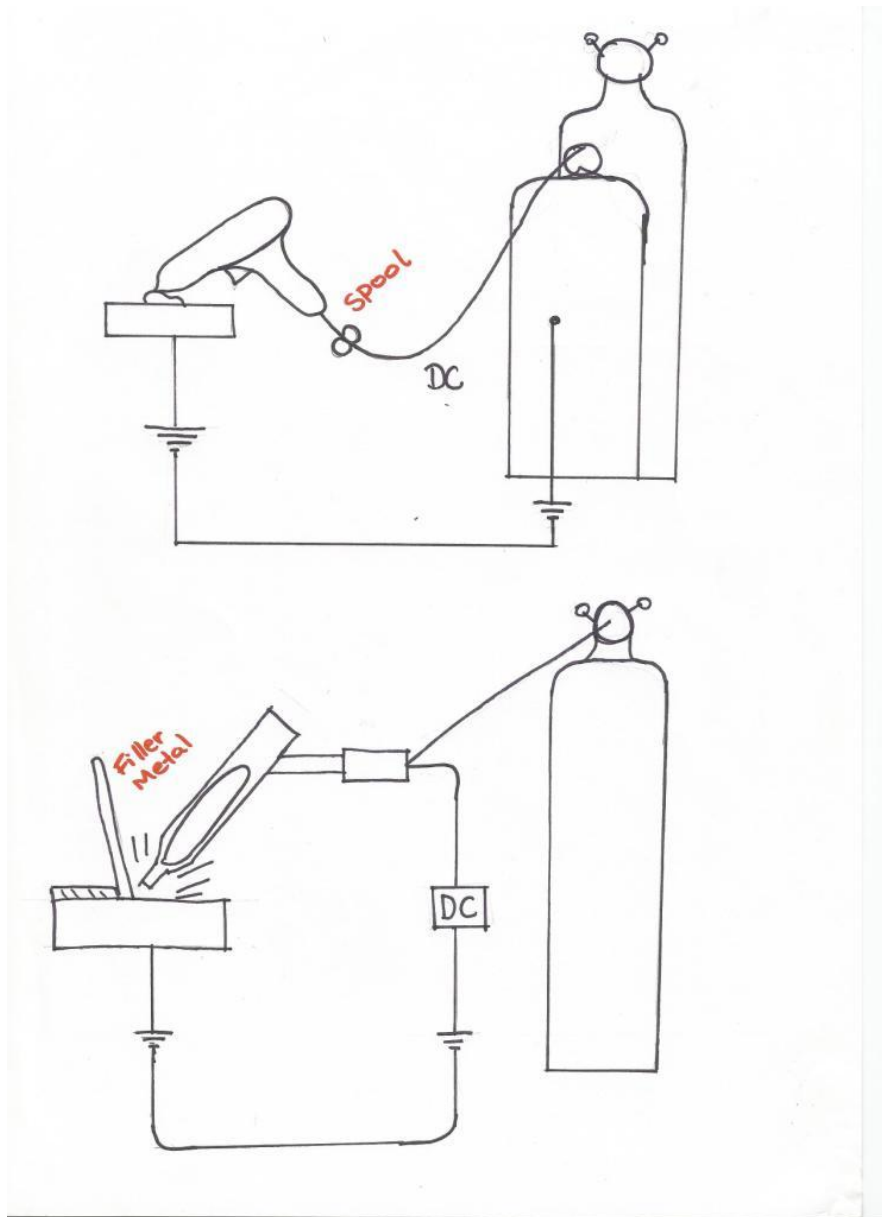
MIG Welding (above) & TIG Welding (below)
